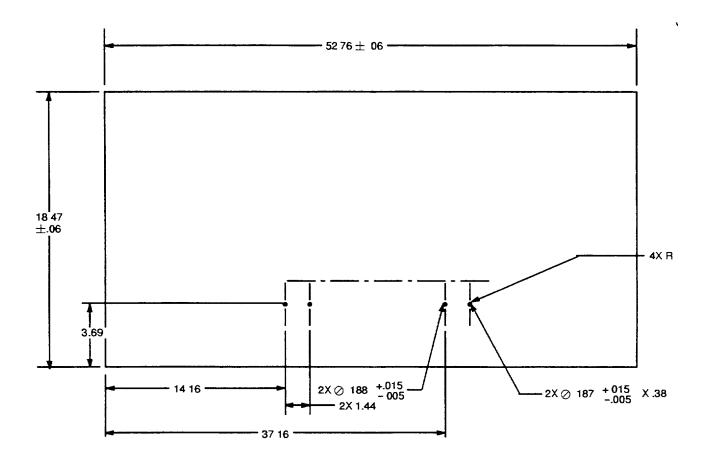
Cover Assembly Pressure Reducing, Panel End
